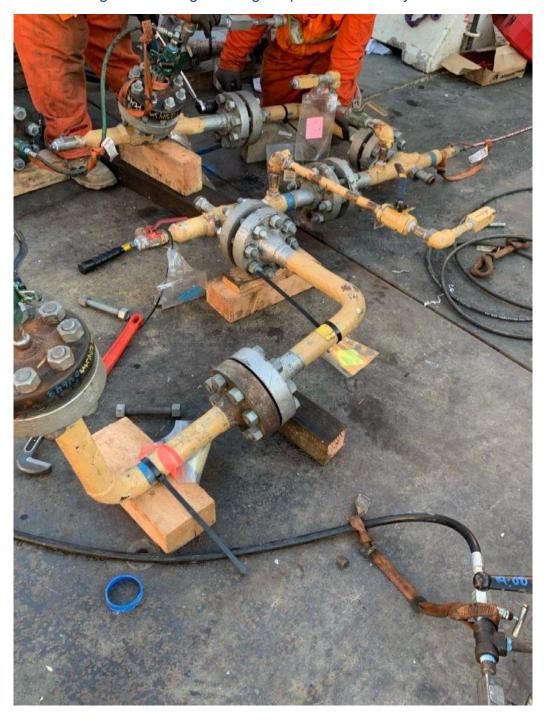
Completed Weld of Pipe and Reducer Flange
